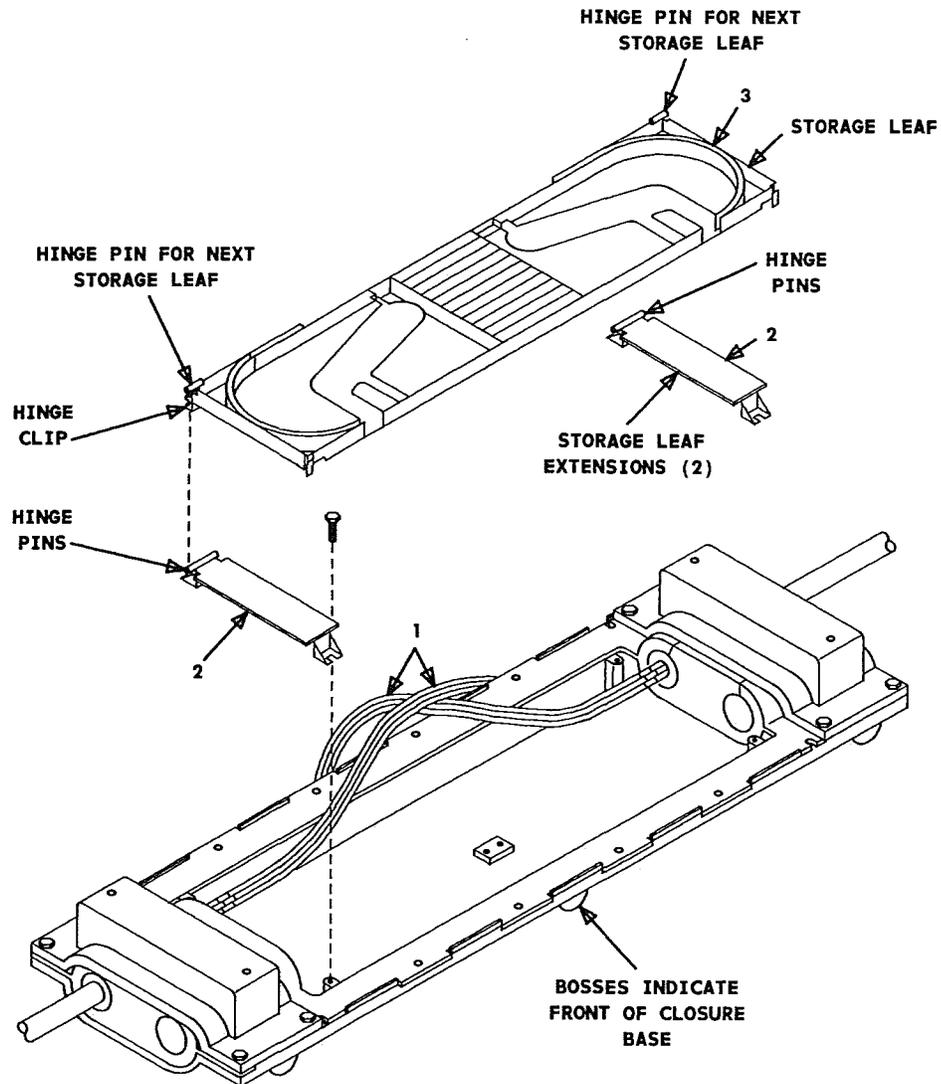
Installing Leaf Extensions and First Storage Leaf
